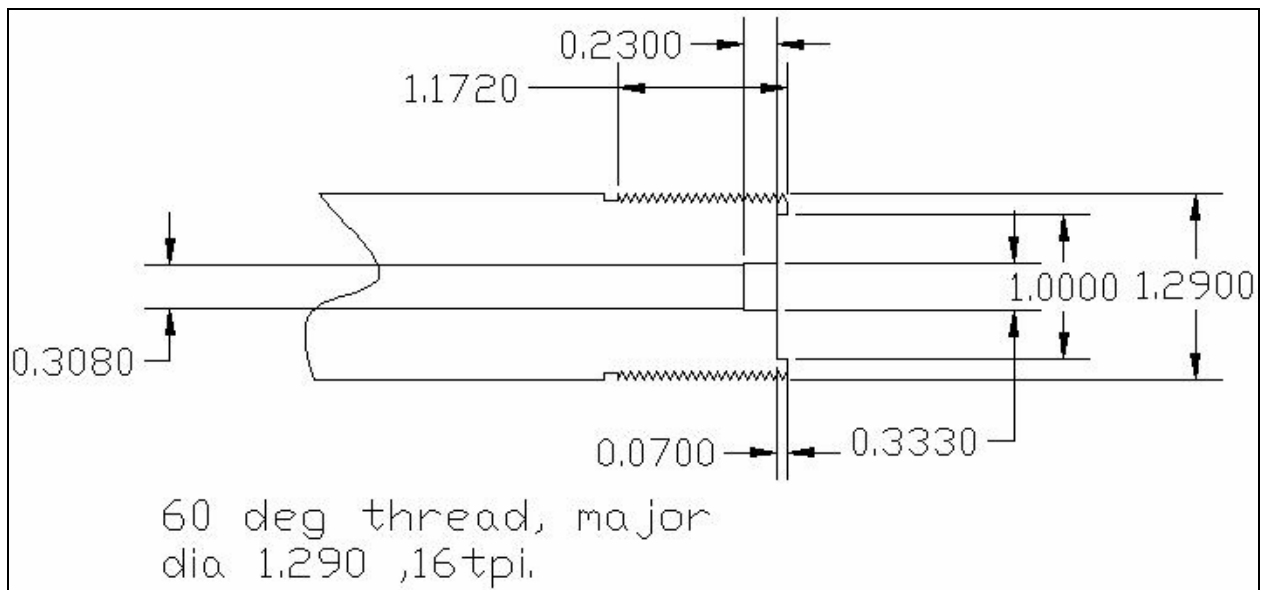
Modification to end of barrel blank to receive custom screw-on chamber.
